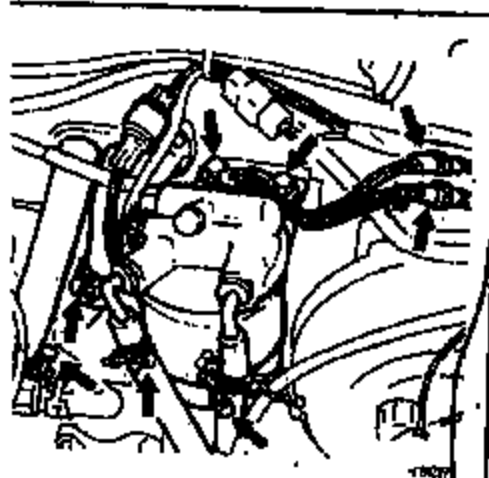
Identify the engine, fuel hoses, fuel filter locations and
